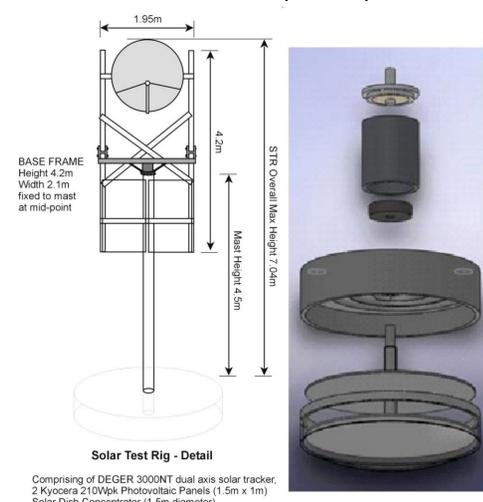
(Left) Drawing of custom sun-tracker with dish and solar panels. (Right) Exploded view of prototype.
